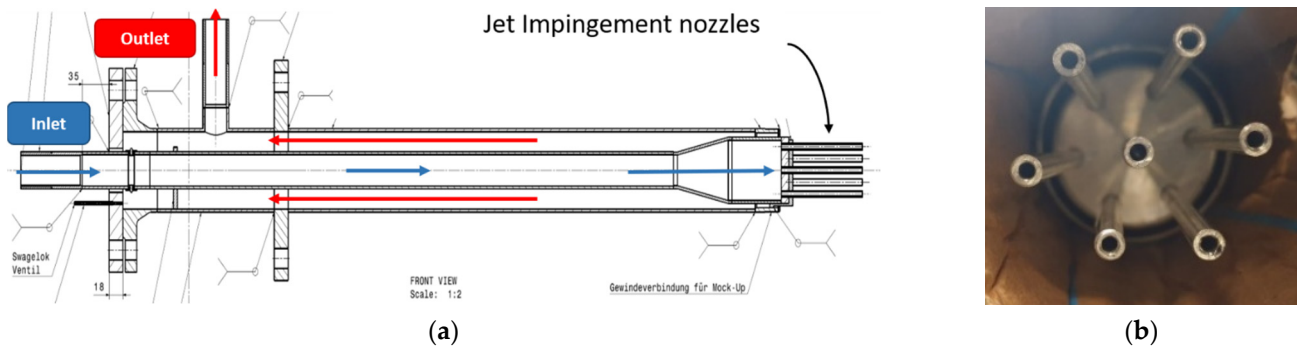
Coolant system used for mock-up: (a) illustration; (b) finalized nozzle heads.
